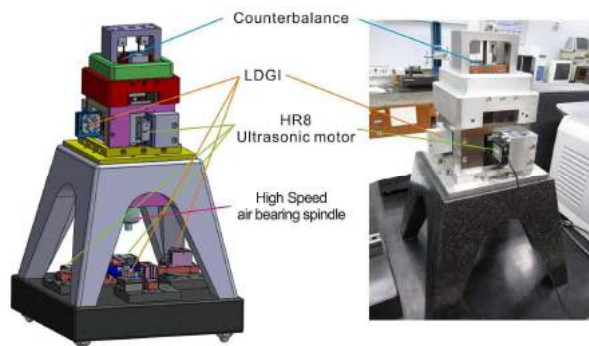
Assembled meso-scale 3-axis milling machine tool.
